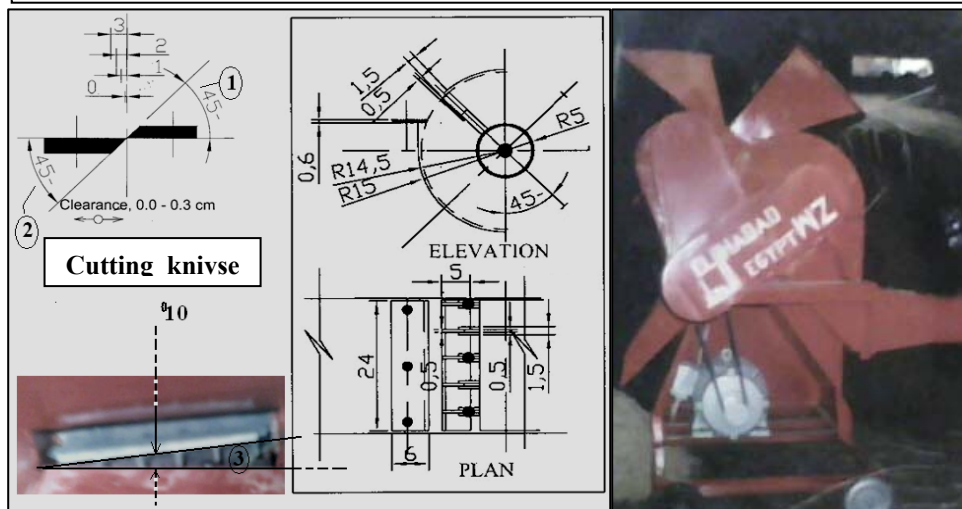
Threshing and winnowing machine model El-Haddad WZ -1 for small holding, (Original machine). Designed and constructed by (El-Haddad, 2000) and patent applied for 280 – 84
